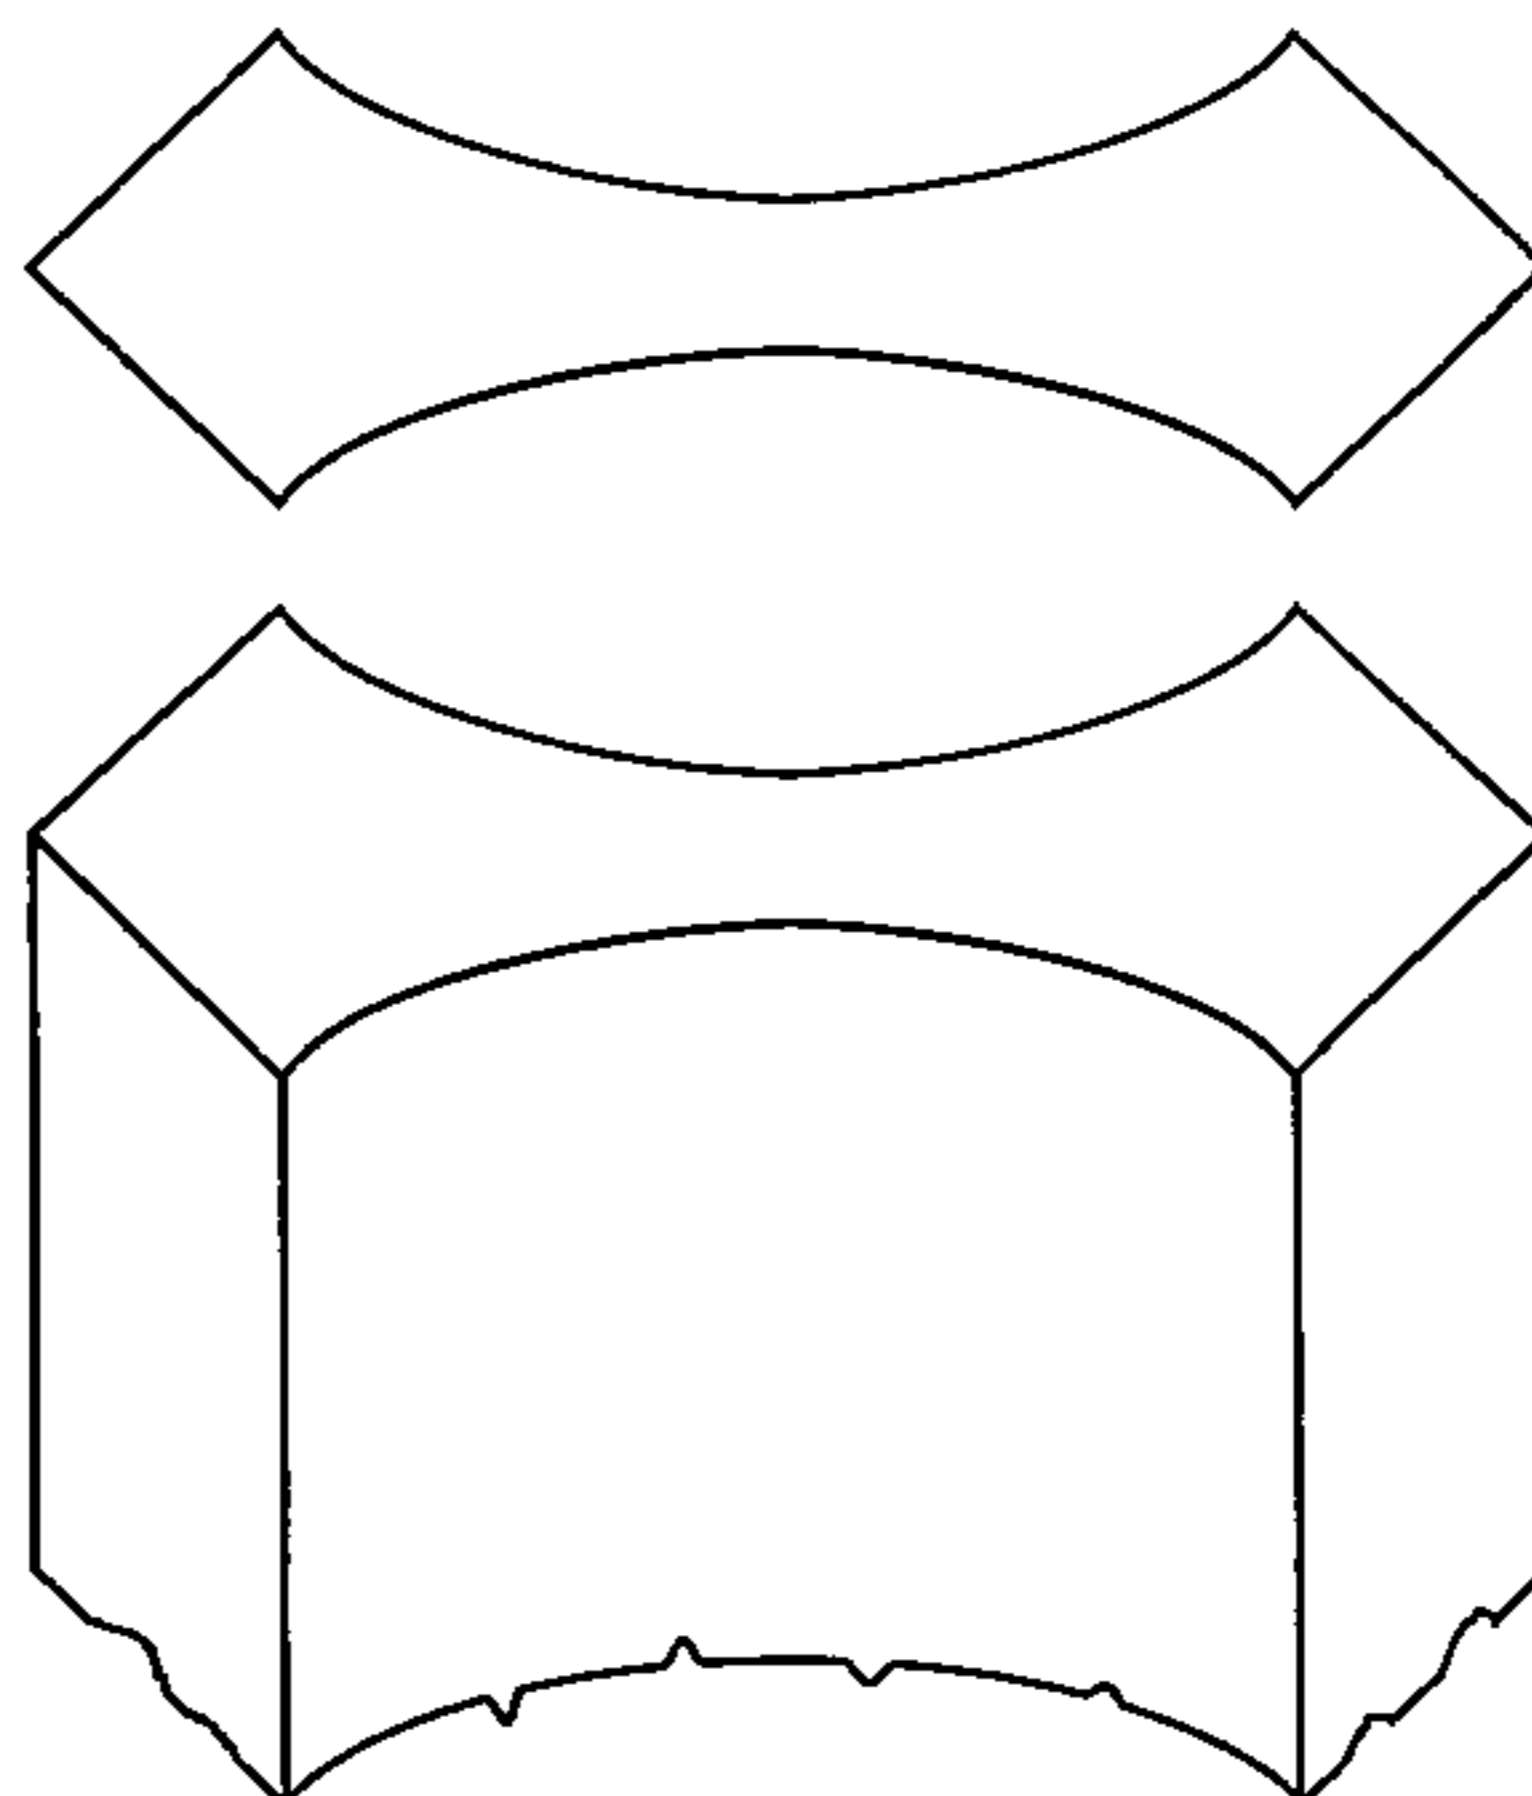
is a fragmentary back side isometric view of the two sided crown molding.
